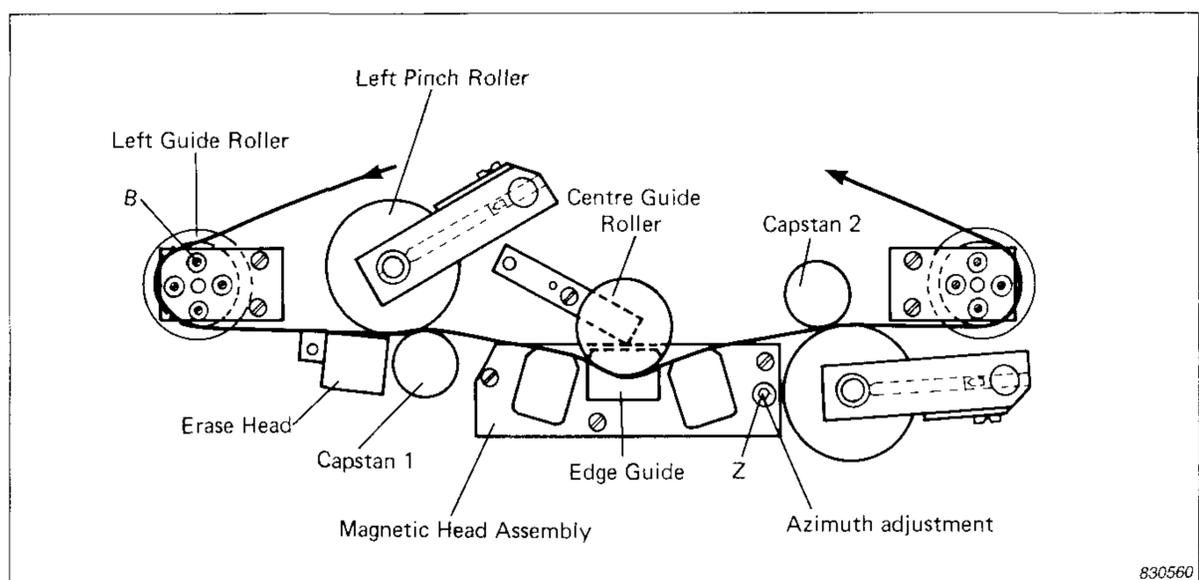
Tape transport and the magnetic head assembly under the front cover. Azimuth adjustment is performed by gently turning screw Z
